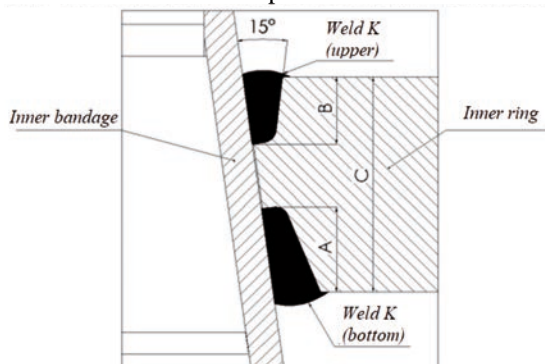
The figure shows the butt weld K for an example of a steering disk
